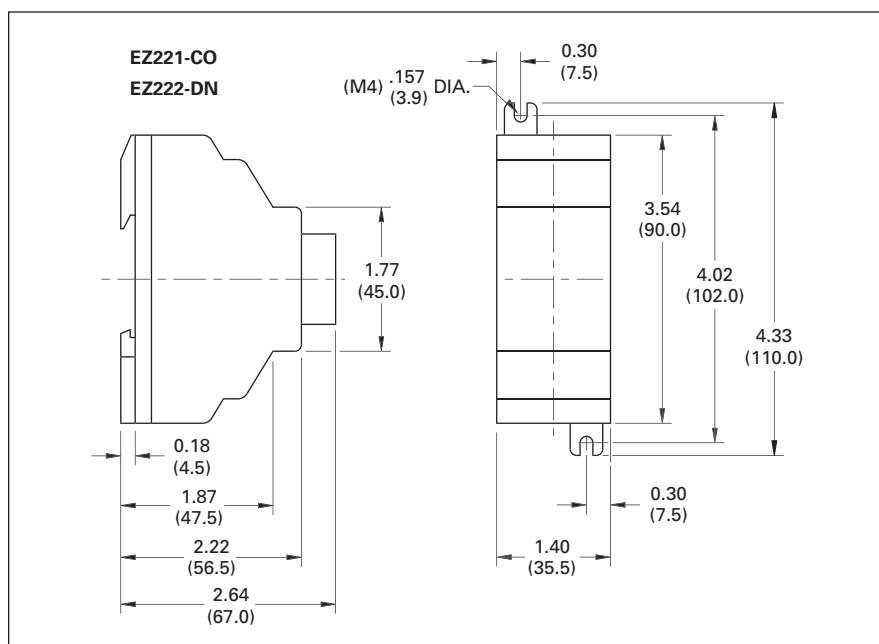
EZ221-CO/EZ222-DN Series Dimensions in Inches (mm), Drawing Number MD05013010E
